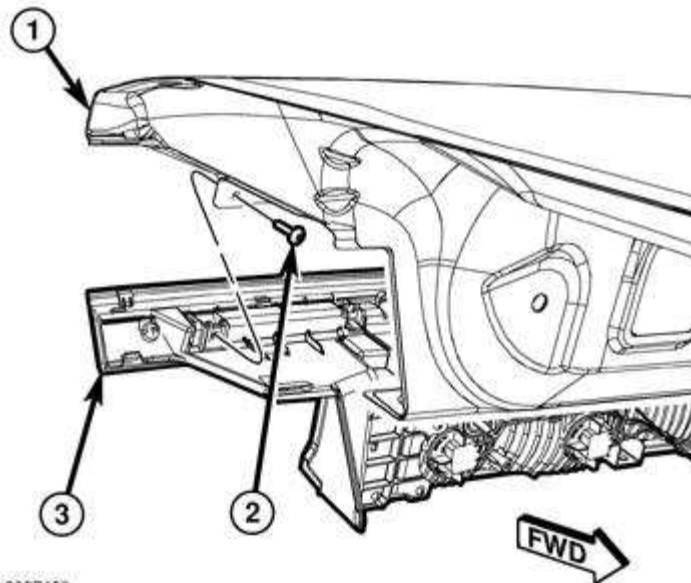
Identifying Deck Lid, Center Tail Lamp Unit & Screws
